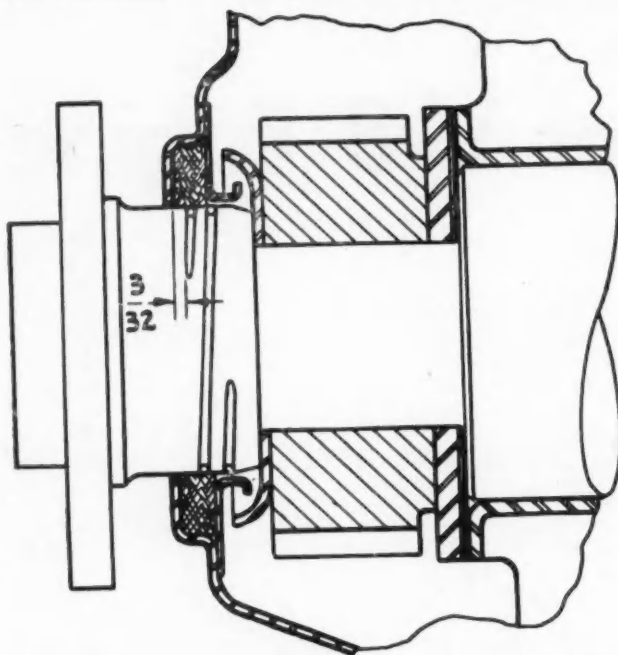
Return groove of oil seal at front end of crankshaft should not project beyond front of felt washer
